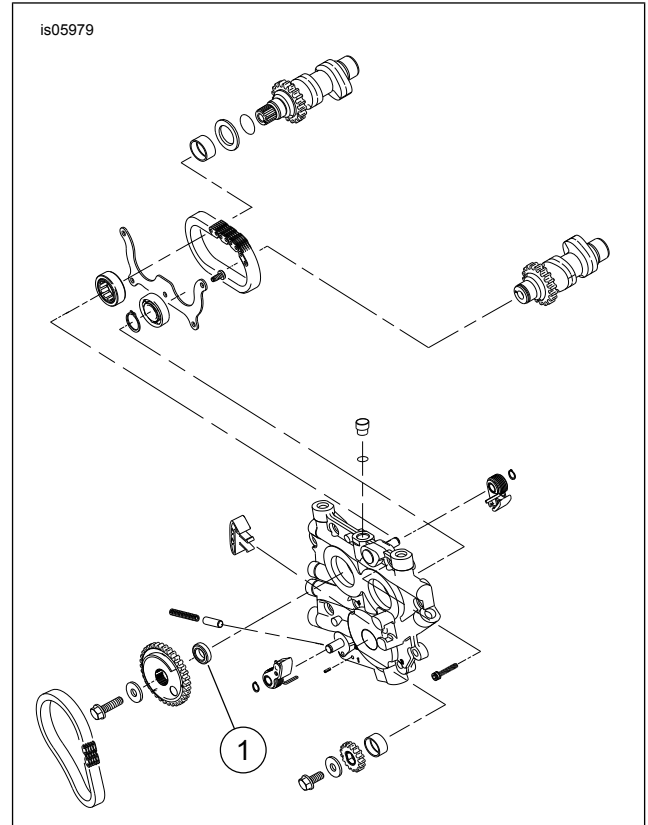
Service Parts: Cam Sprocket Spacer Kit
